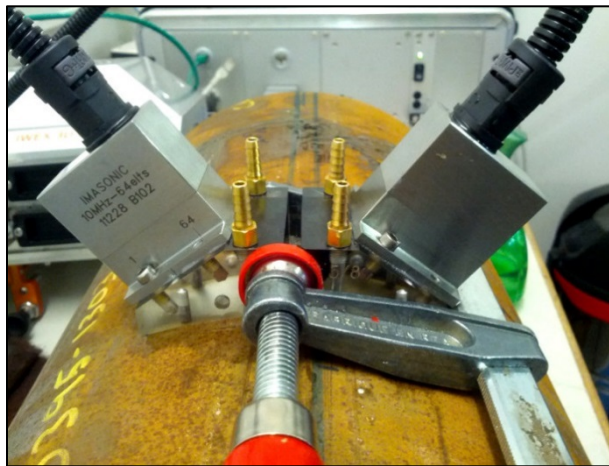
Basic IWEX test setup with wedges on both sides of the weld
